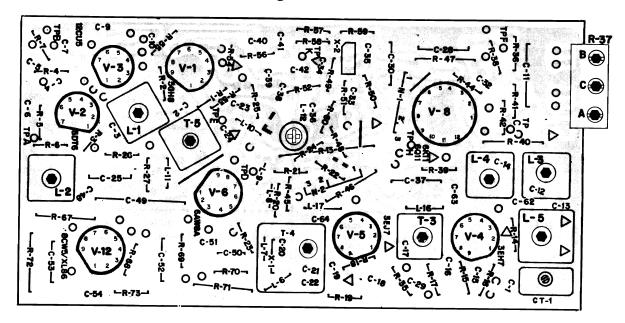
ETCHE D PRINTED CIRCUIT BOARD (TOP VIEW)
